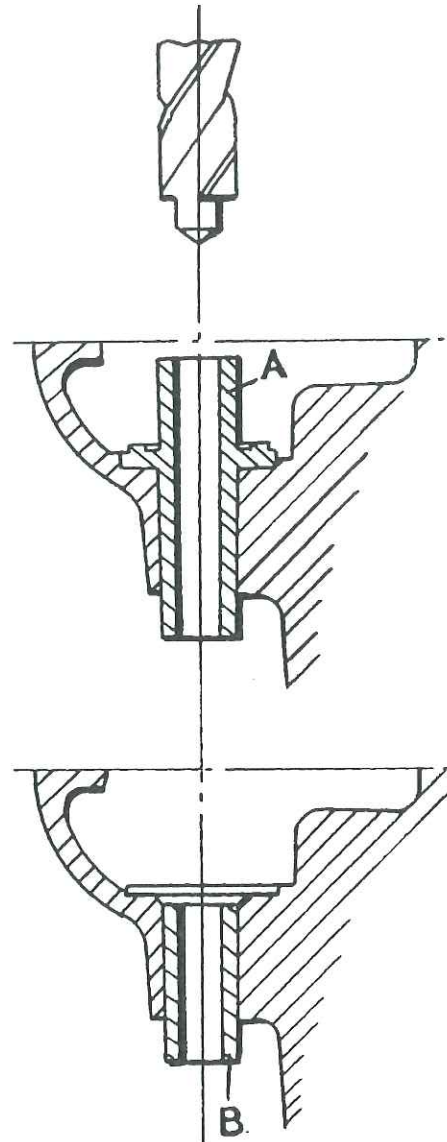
Method of removing inlet and exhaust valve guides. Using 14 mm. step drill for inlet guide and 17 mm. step drill (see Fig. 45) for exhaust guide, cut away portion with collar A, and use drift to remove portion B.
